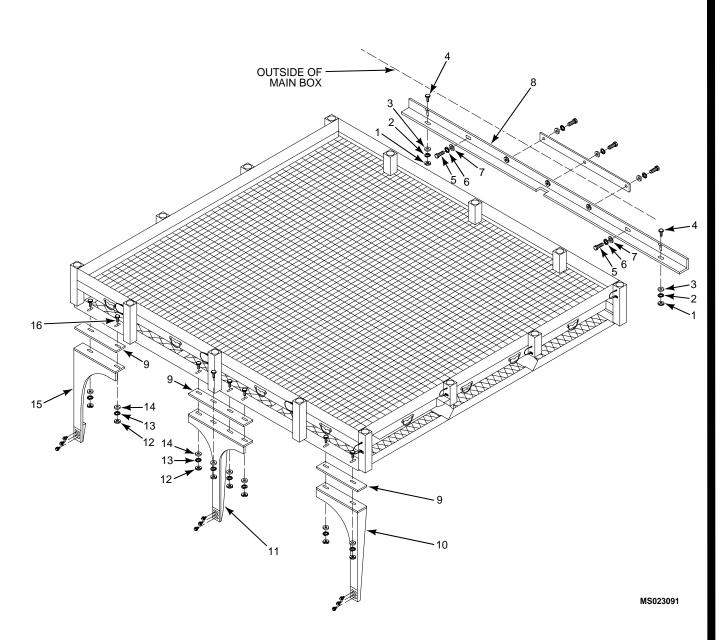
Overhead Cargo/Maintenance Rack Assembly Installation
